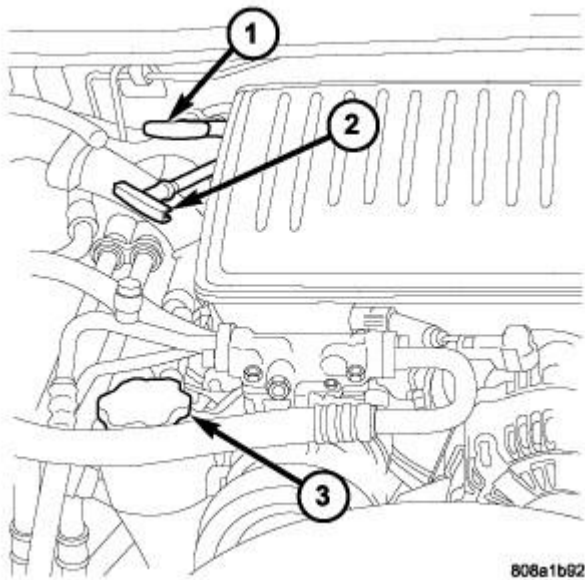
Transmission And Engine Oil Dipsticks & Engine Oil Fill Cap
